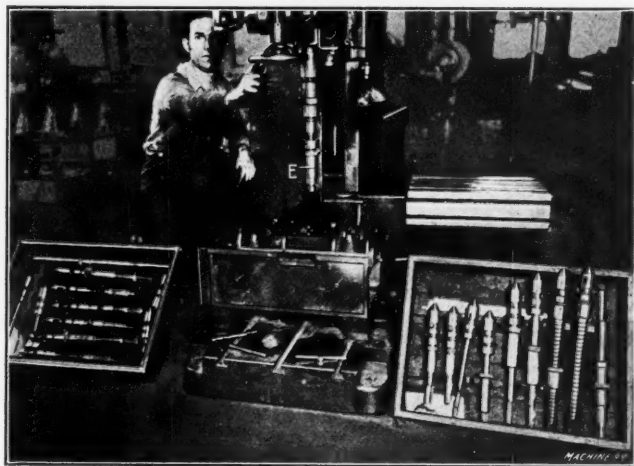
Jig and Tools used for machining Double-plate Lathe Aprons
